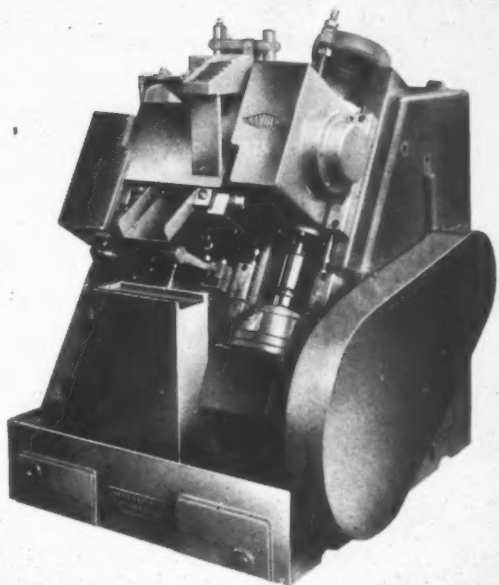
Landis Machine for the Centerless Grinding of Screw Threads on Straight, Headed, or Multiple-diameter Cylindrical Work-pieces
